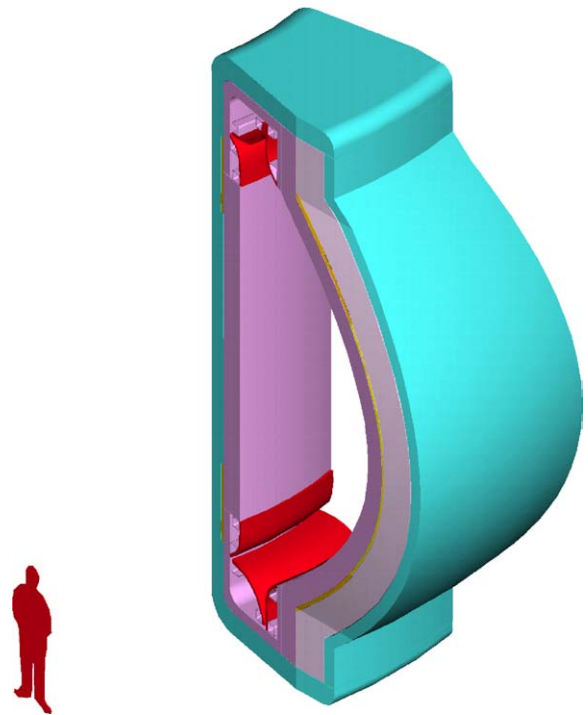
Removable sector containing first wall, blankets, divertor, and supporting structure.
